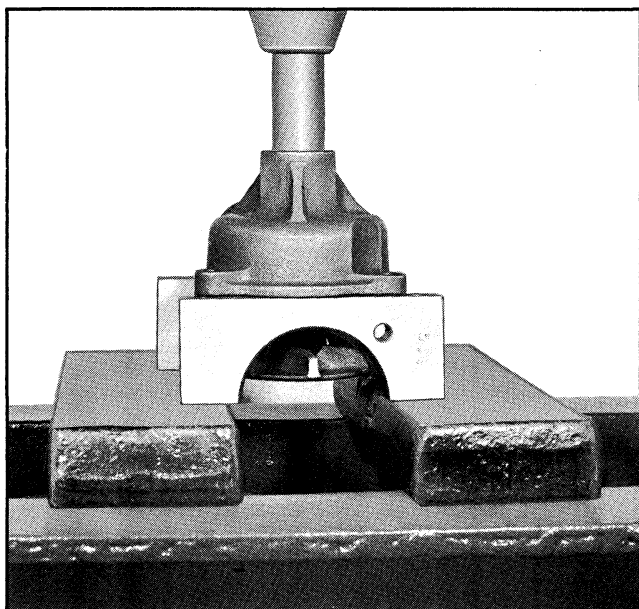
A-20 Pressing Shaft, Bearing and Impeller Assembly From Pump Housing
